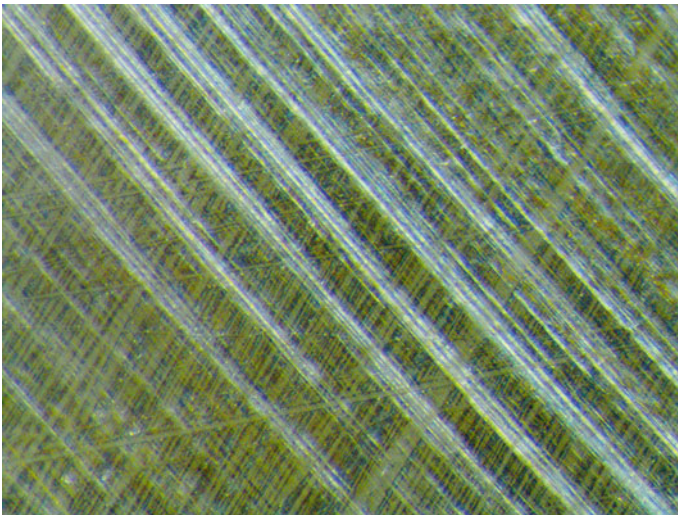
Plane tooth flank of an IPB wheel finished by one path with a CBN disk tool
